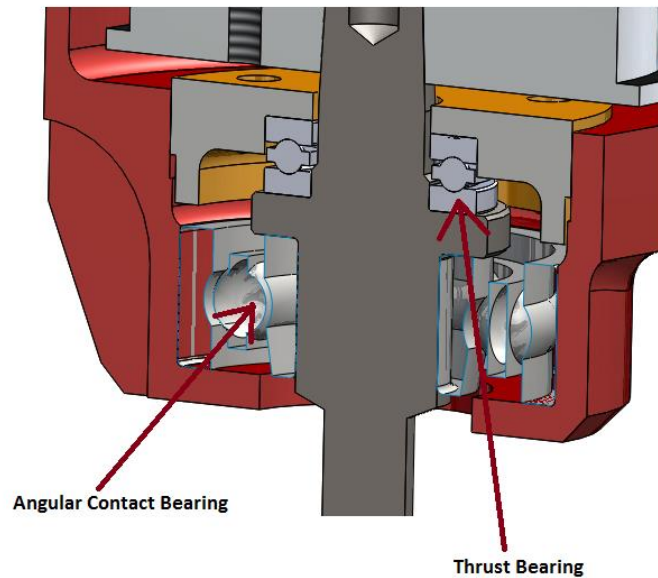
THRUST BEARINGS CAPTURE ROLLER SCREW.
